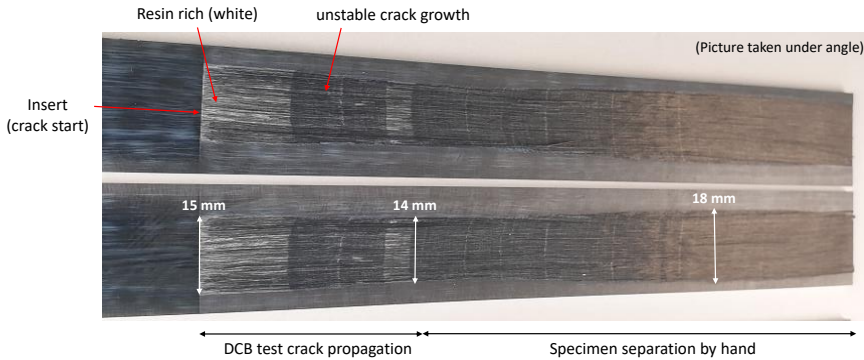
DCB fracture surface of full weld specimen with observed variation in weld width.
